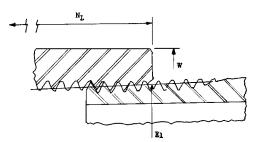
Nonrecessed Taper-Tapped Coupling and Pipe (See Table 3 for Coupling Dimensions)
